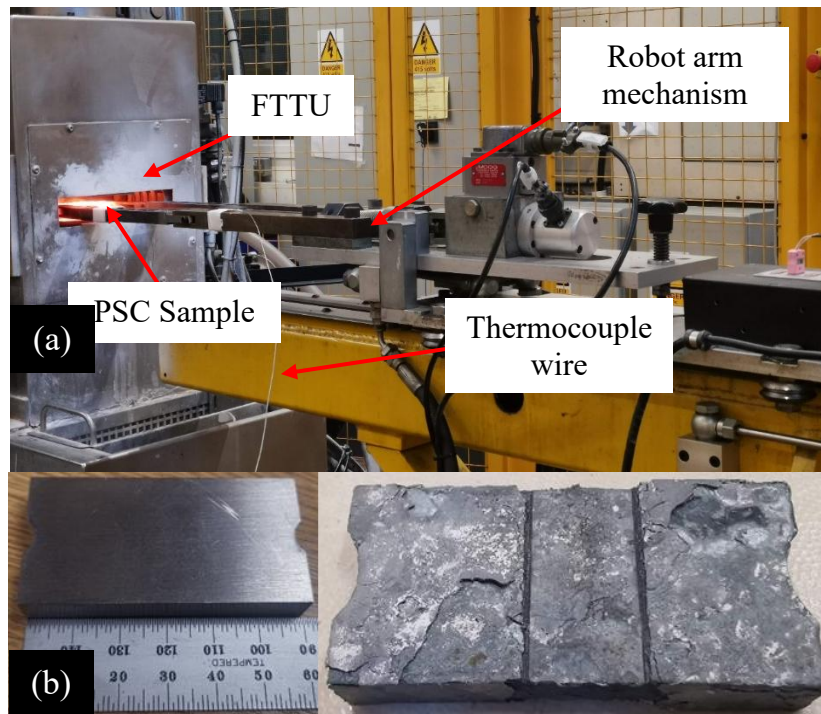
(a) Robot arm of the TMC machine inserting and holding a sample in the FTTU, and (b) an example specimen before and after PSC testing with two deformation passes performed
